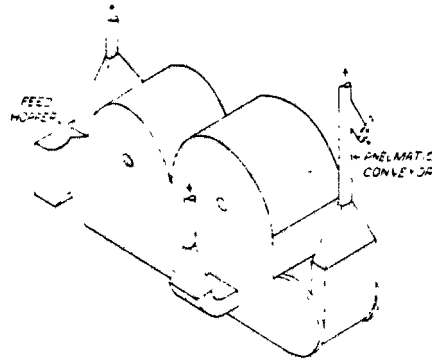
SCHEMATIC DRAWING OF EXHAUST SYSTEM USED WITH PICKER MACHINE
